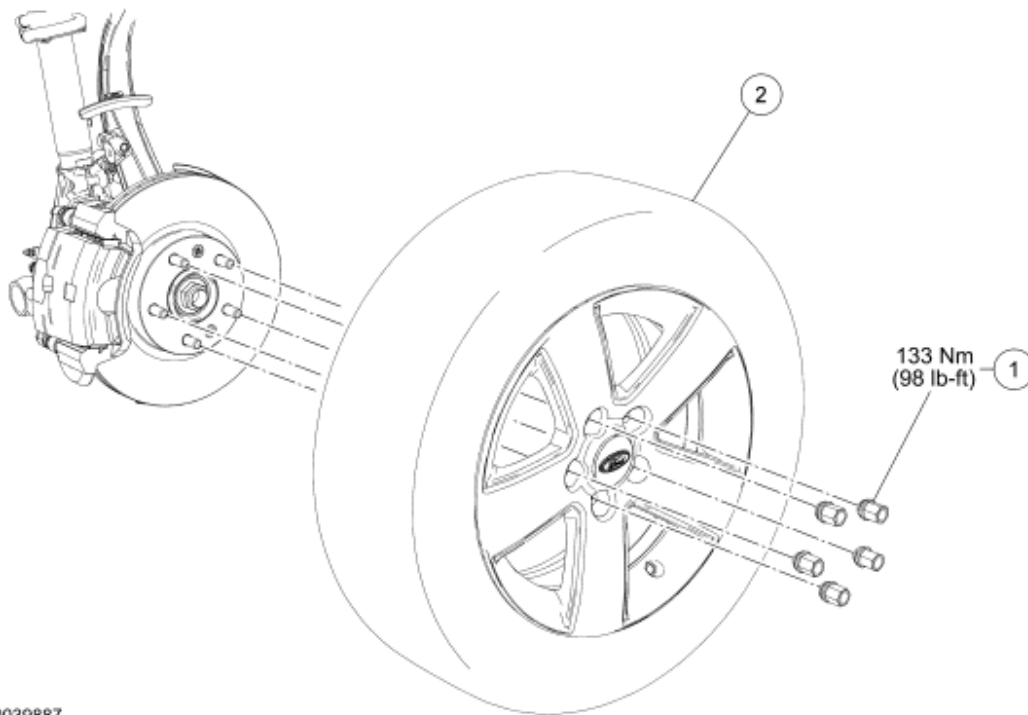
Exploded View Of Wheel & Tire Assembly With Torque Specification
